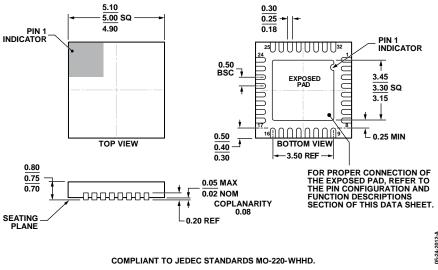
32-Lead Lead Frame Chip Scale Package [LFCSP_WQ] 5 mm × 5 mm Body, Very Thin Quad (CP-32-13) Dimensions shown in millimeters
